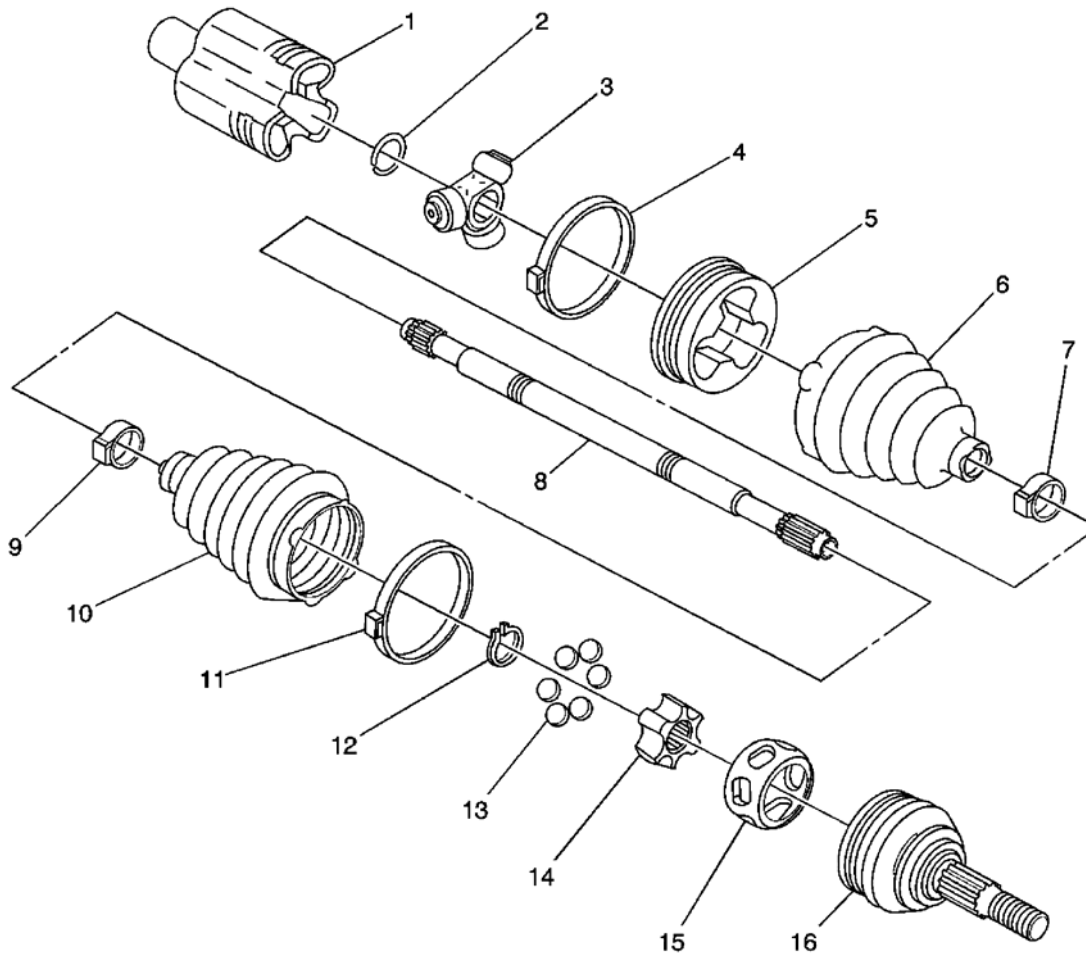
Tripot Design Wheel Drive Shaft Disassembled View
